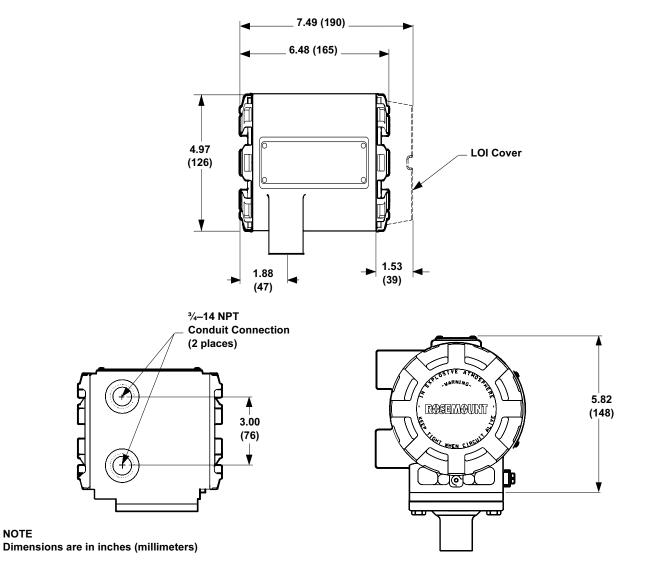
Rosemount 8732/8742 Dimensional Drawings
